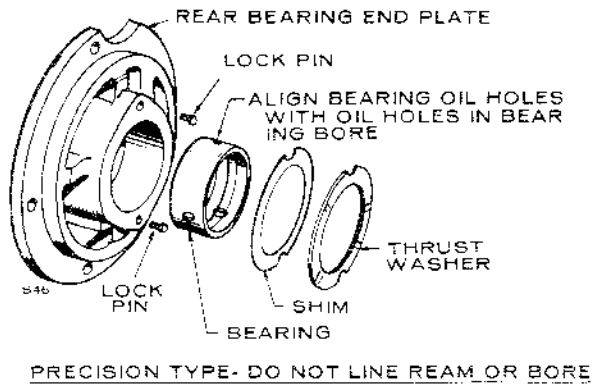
BEARINGS FOR REAR BEARING PLATE
